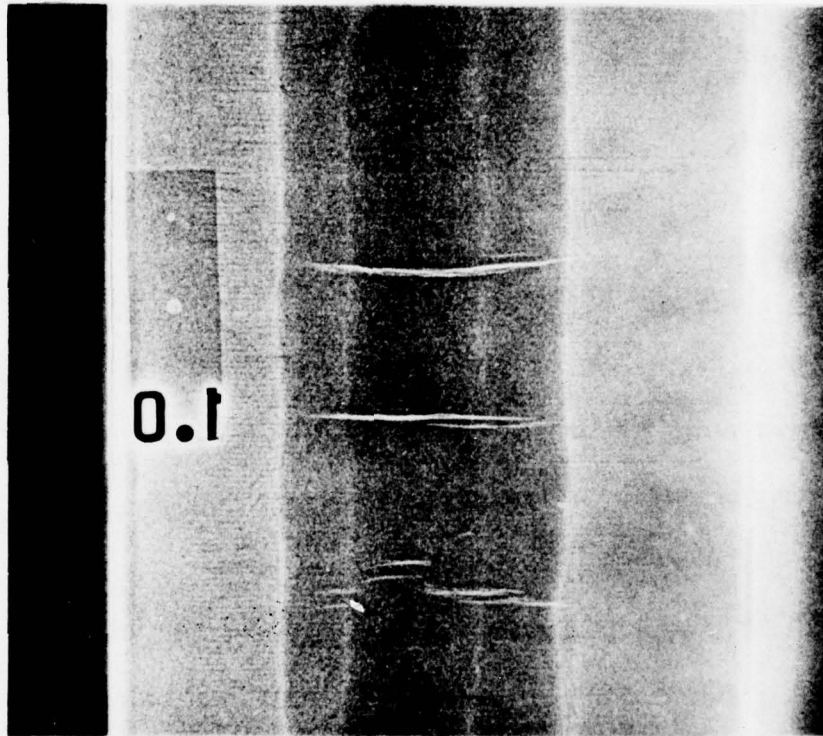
A portion of Xeroradiograph taken of plate MPS-2 showing weld metal transverse cracks
